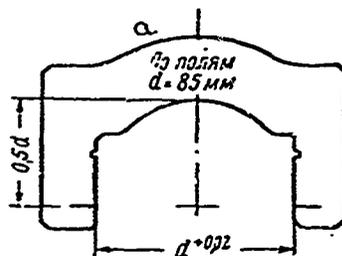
Bracket for setting the vernier gauge of a mechanical star gauge on 0
